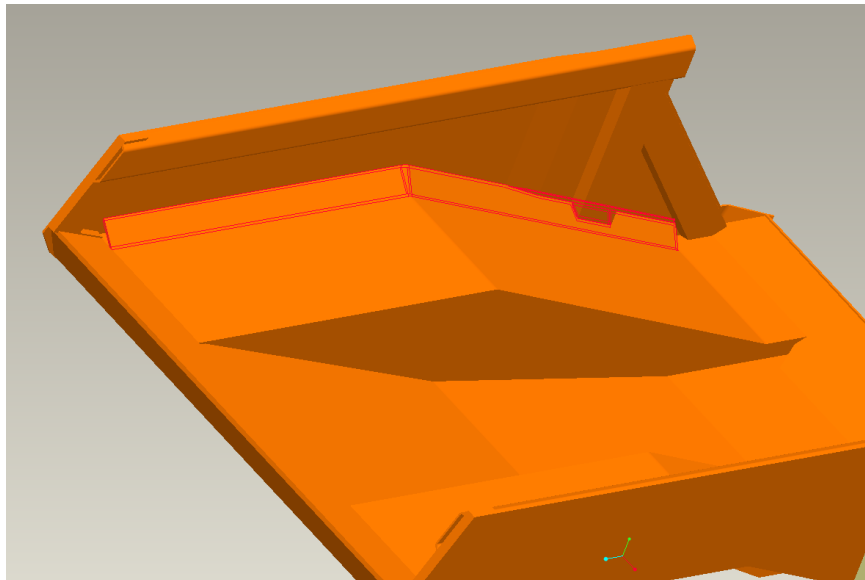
Concept 1 - The addition of the side wall to upper floor section reinforcement plate, marked in red color.
